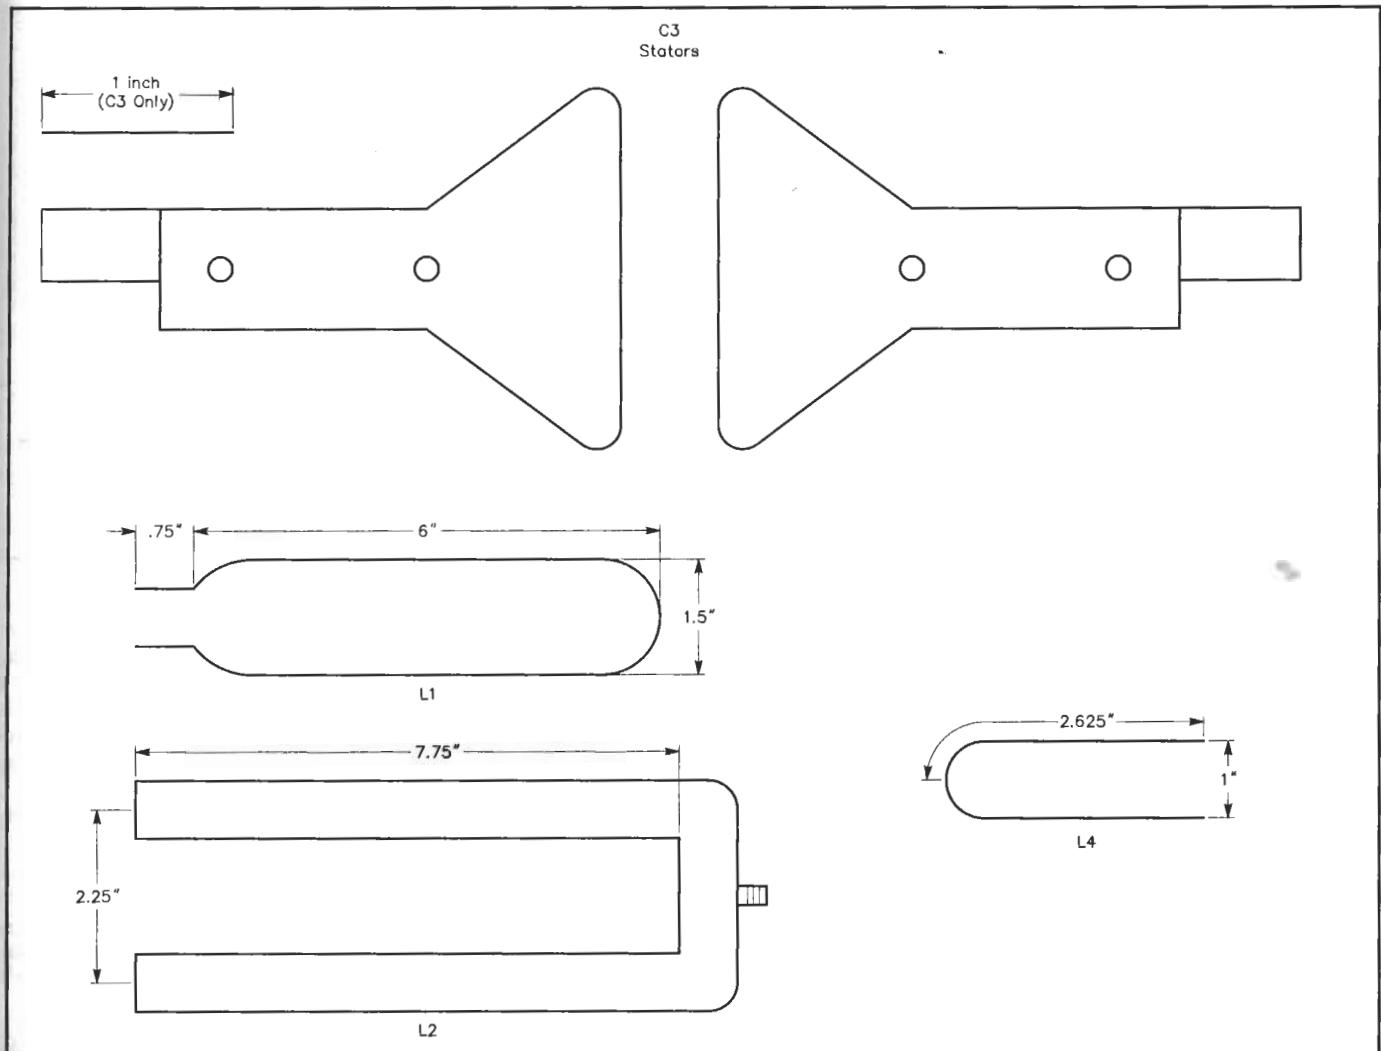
Details of 2-meter input and output tank indicators and the 2-meter TUNE capacitor stators.
